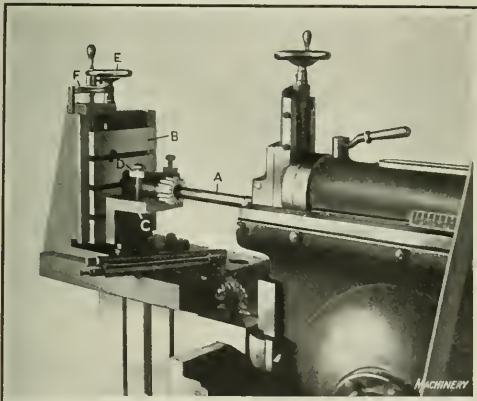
Use of a Keyseating Fixture for machining the Keyway in Bronze Sleeve Gears for Shapers
